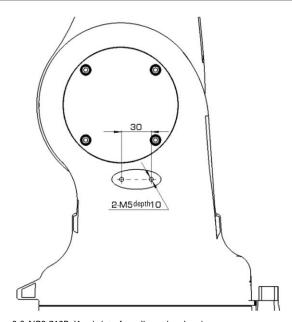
AIR8-710B J1 axis interface dimension drawing
